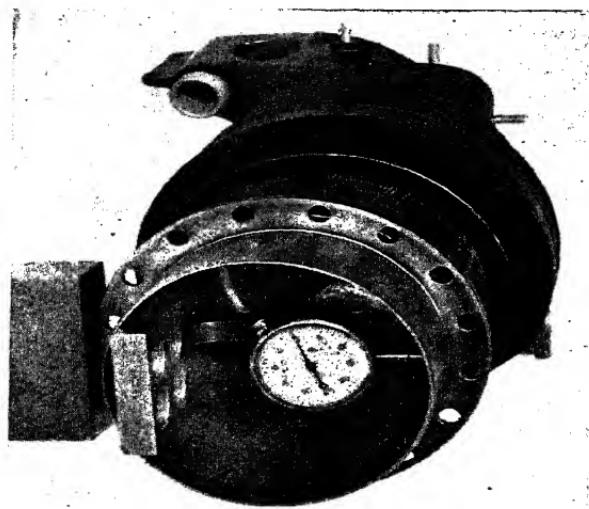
Dial gage fixture to check cylinder for out-of-roundne
